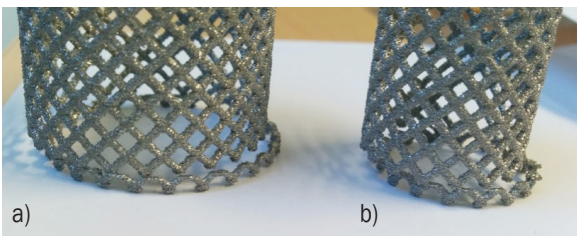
Photography of the 2 mm mechanical shifting: a) Ø30 mm, and b) Ø20 mm
